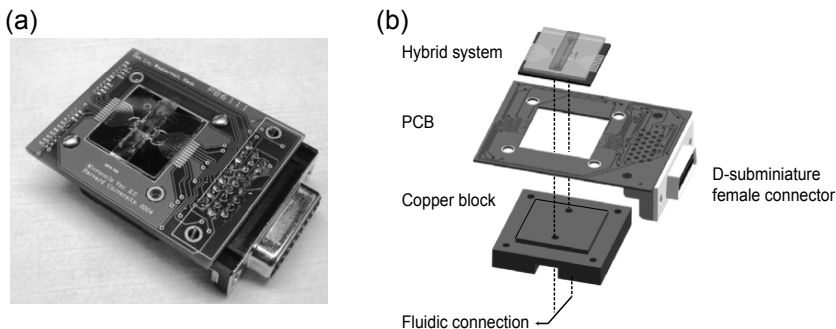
Complete cell manipulation system (a) The assembled cell manipulation system is packaged using a copper block and a PCB. (b) Schematic of the packaging. Fluidic connections are made through the backside of the hybrid system, freeing the front side of the system from fluidic tubing components. The copper block is used for cooling. Reprinted from [27] by permission of The Royal Society of Chemistry.
